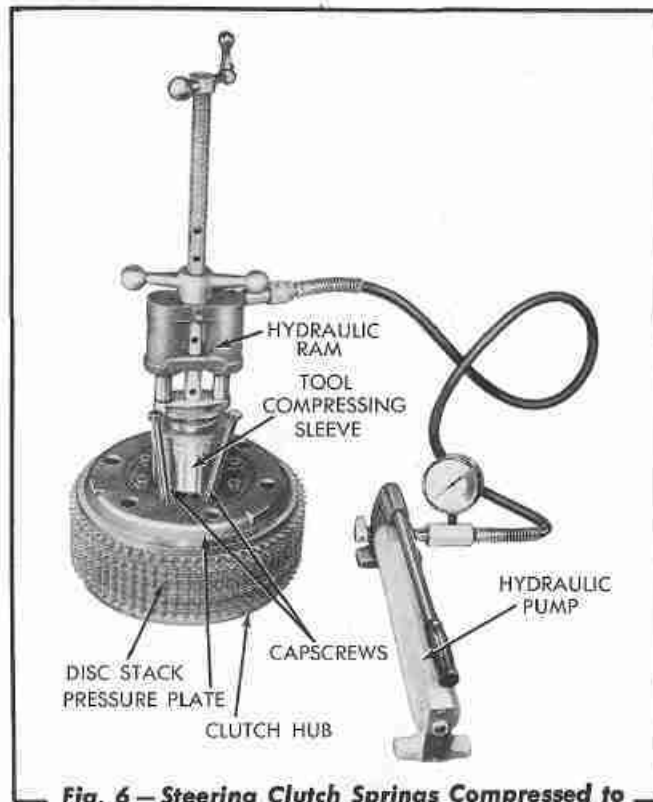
Steering Clutch Springs Compressed to Remove Capscrews
